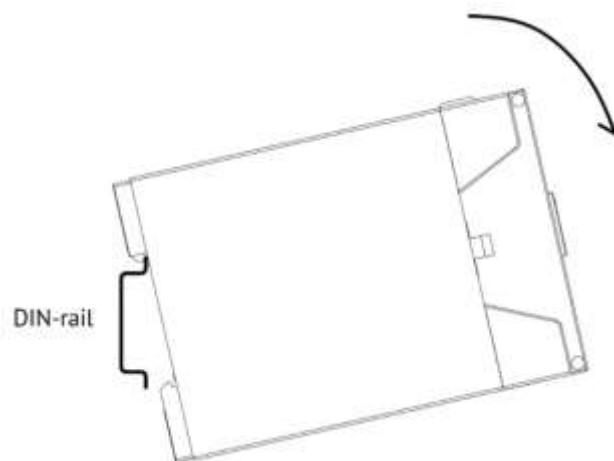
M1000 Standard installation to 35 mm DIN-rail.
